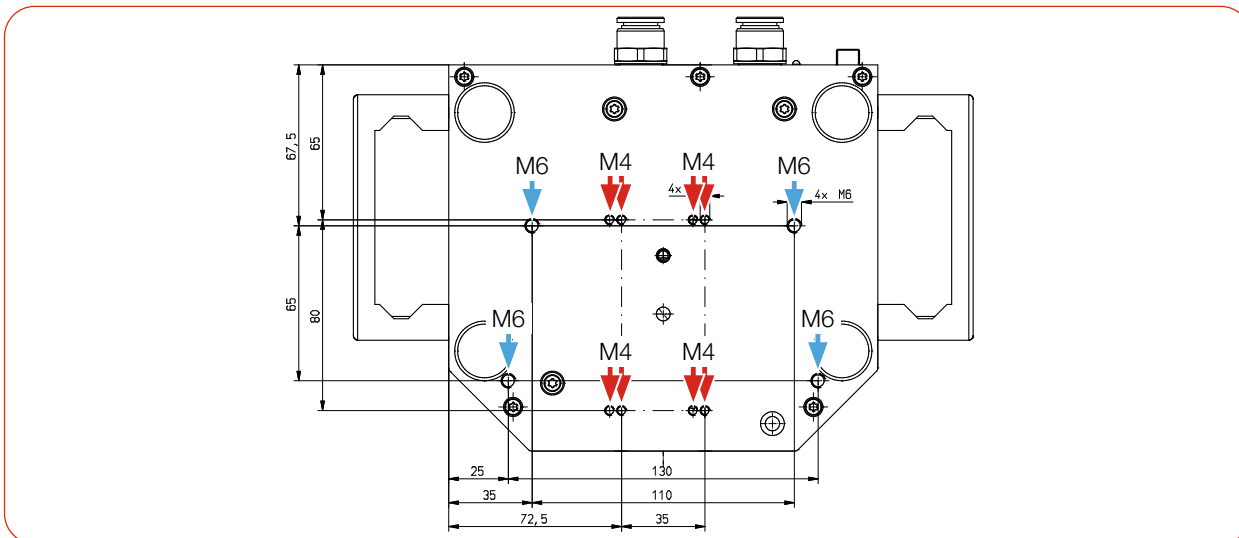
Mounting threads M4 and M6 in the bottom of the housing of the CPM F-20 (dimensions in mm)
